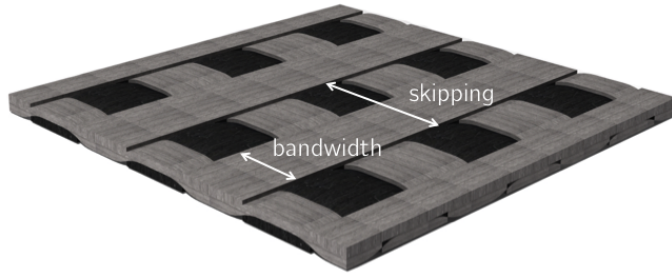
3D CAD drawing of the most straightforward AP-PLY Pattern
